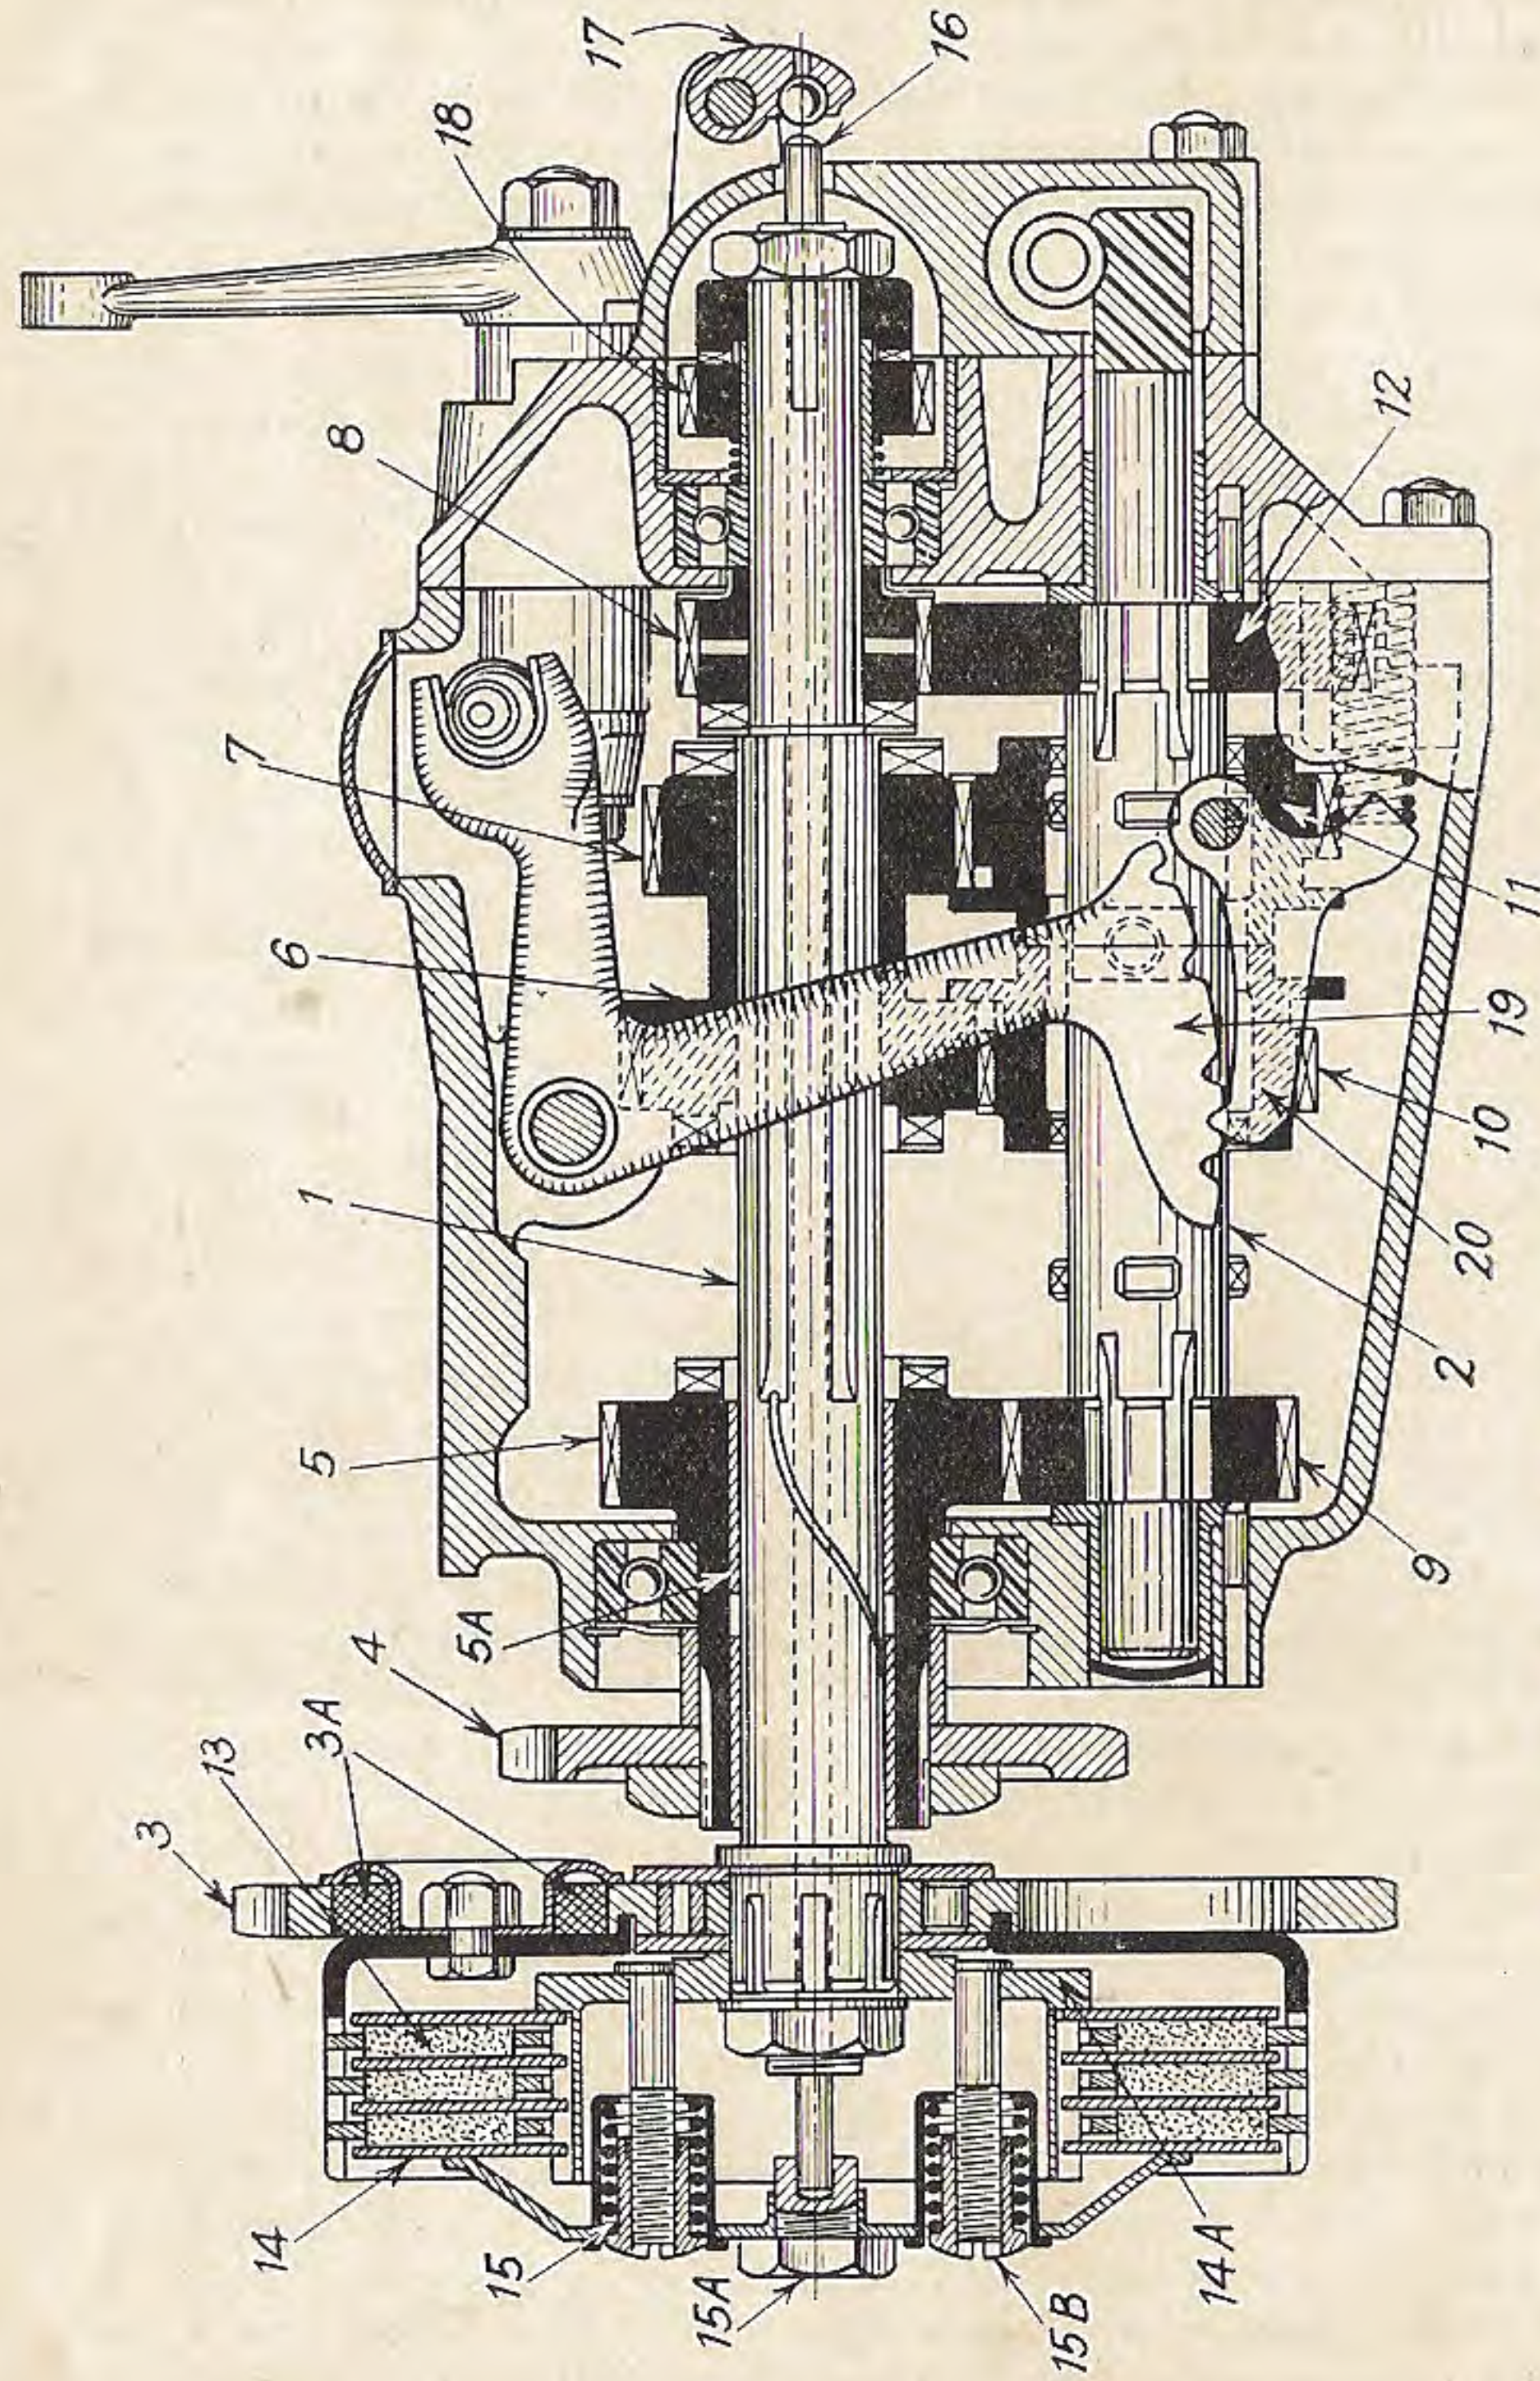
SECTIONAL VIEW OF BURMAN 4-SPEED GEARBOX AND CLUTCH
